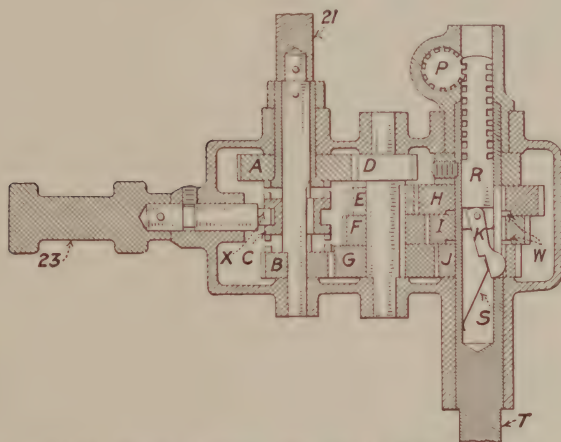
Vertical section through feedbox of Cincinnati-Bickford upright drill (Fig. 11). One series of feeds (the slower series) is obtained by engaging the clutch *C* with the driving gear *B* and engaging the sliding spring key *K* in the different driven gears. For example, the slowest feed is obtained by engaging the clutch *C* in gear *B* and the spring key in gear *H*. Motion is transmitted through a compound gear train, from smaller gear *B* to the larger gear *G* and from the smaller gear *E* to the larger gear *H*, causing the driven shaft *T* to revolve much slower than the feed shaft (21).
